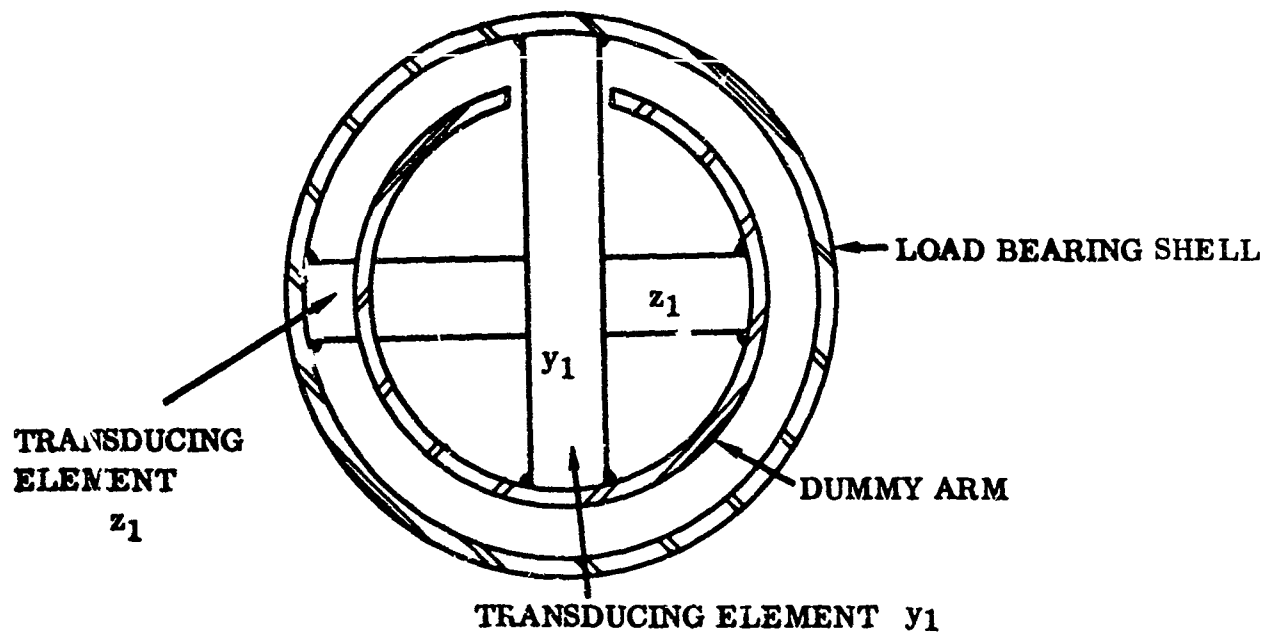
CROSS SECTION OF SHELL LOAD MEASURING SYSTEM
